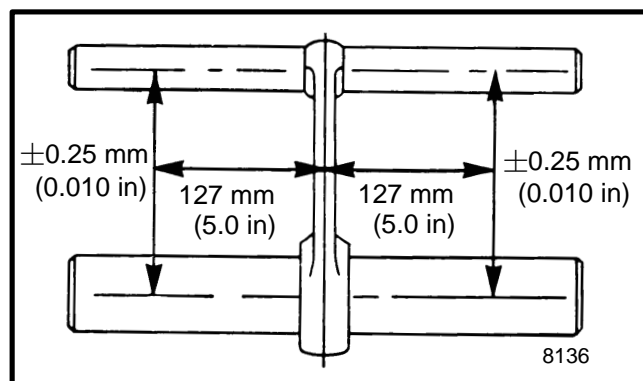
ALIGNMENT OF CONNECTING ROD BORES WITH BUSHING REMOVED
